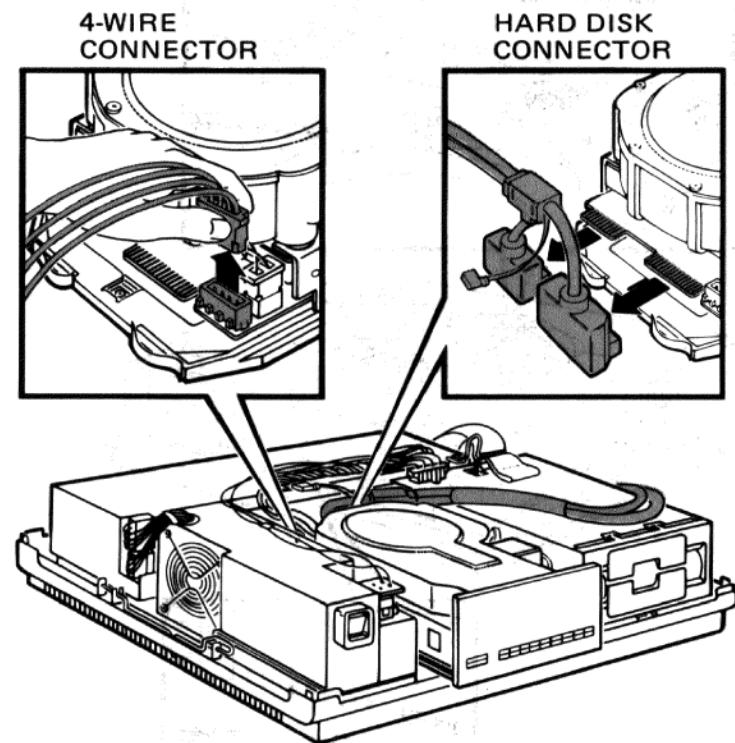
Hard Disk Drive 4-Wire Power Cable and Hard Disk Drive Cable Removal
